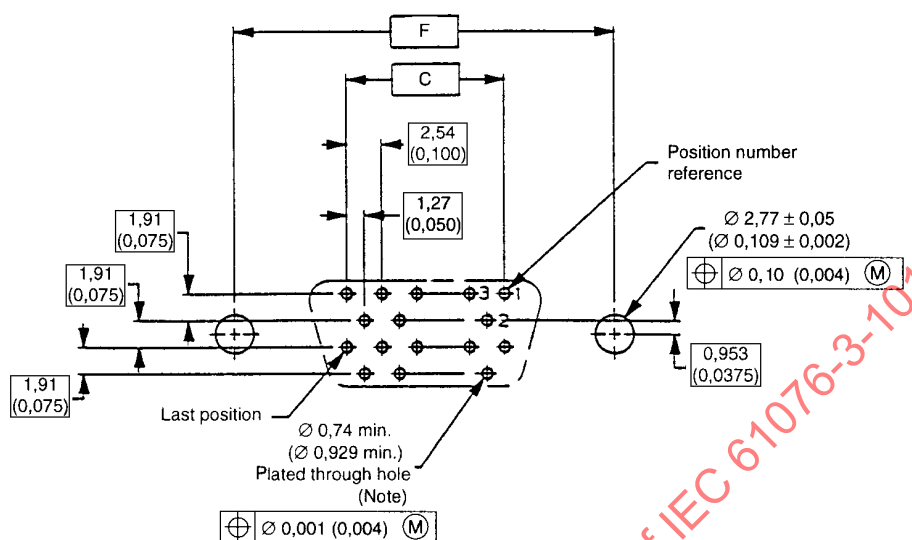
Detail for 10, 26, 38 and 50 positions, connector side of board
